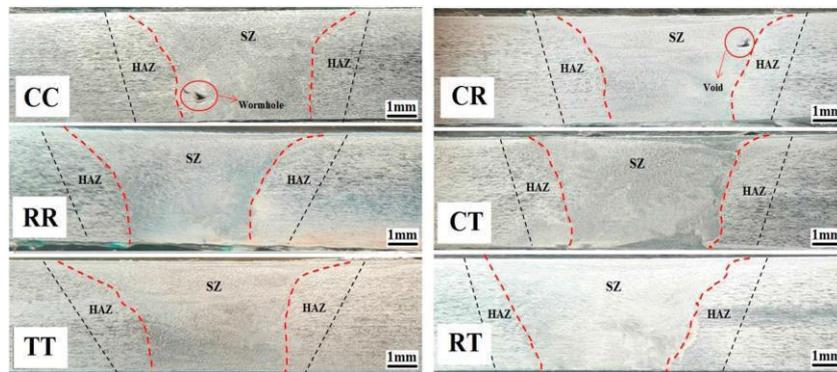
Macrographs of welded joints through the use of various dual-pin tools.
